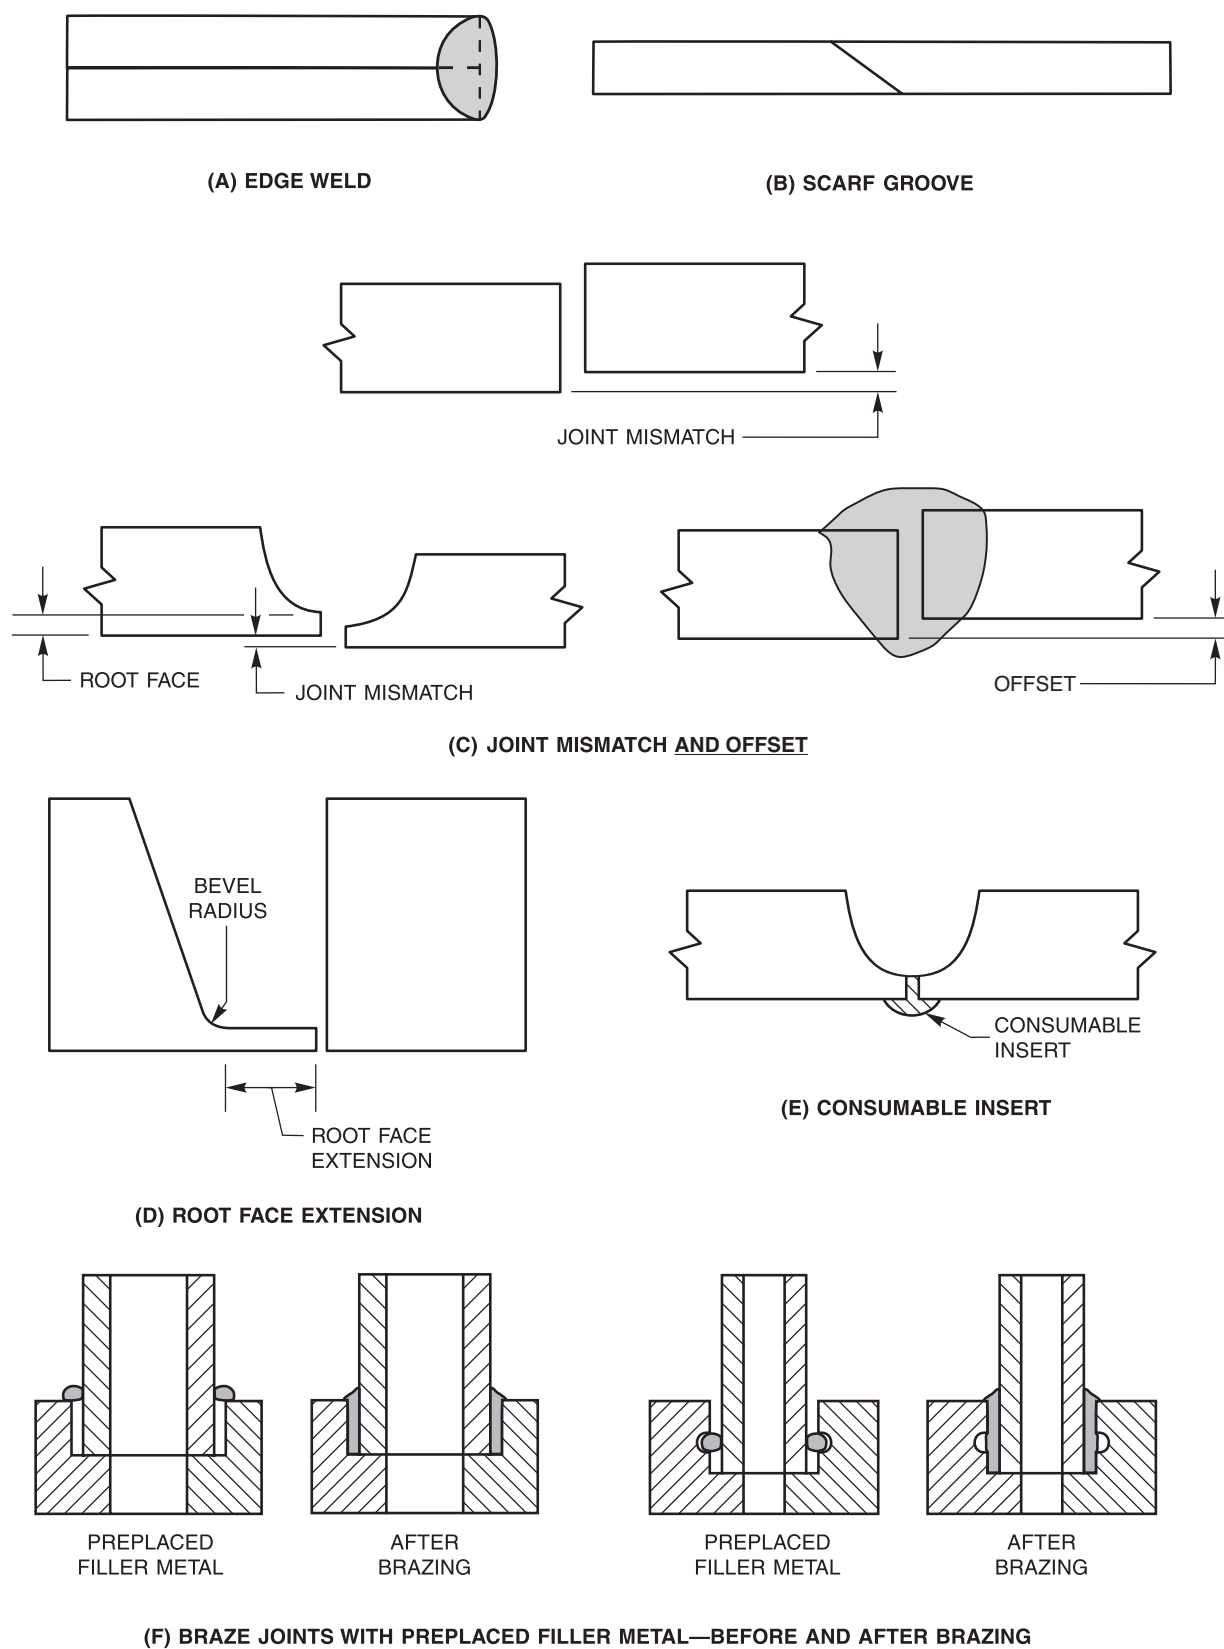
Edge Weld, Scarf Groove, Joint Mismatch, Root Face Extension, Consumable Insert, and Preplaced Filler Metal in a Brazed Joint
